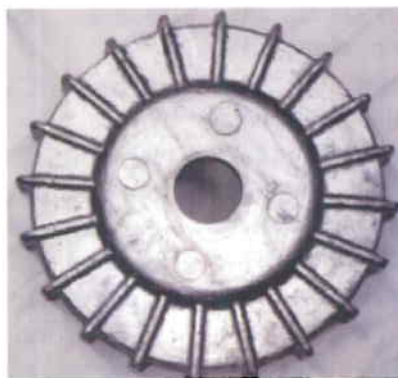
(b): MMC Brakedrum - 300 mm - Four Wheeler
